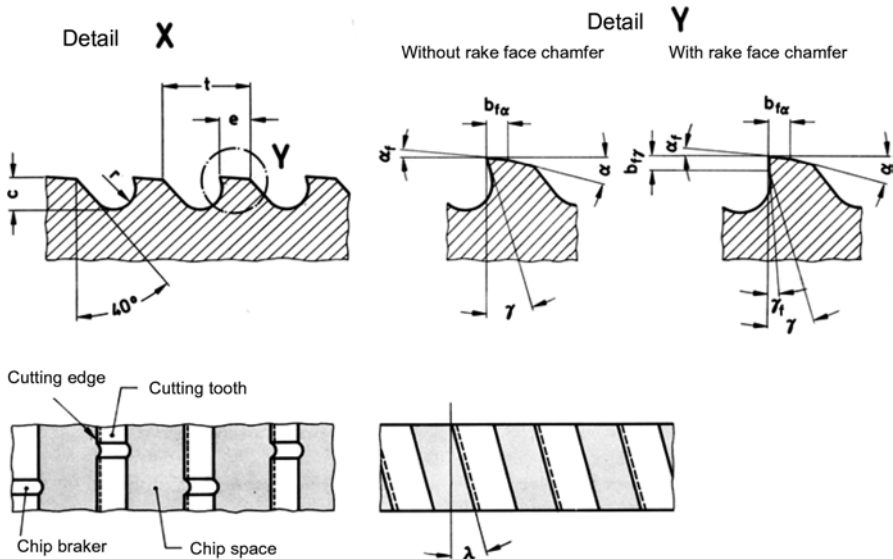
Cutting edge geometry of a broach according to Figure 12.7, at the bottom right, cutting edges of a broach with inclined blades
